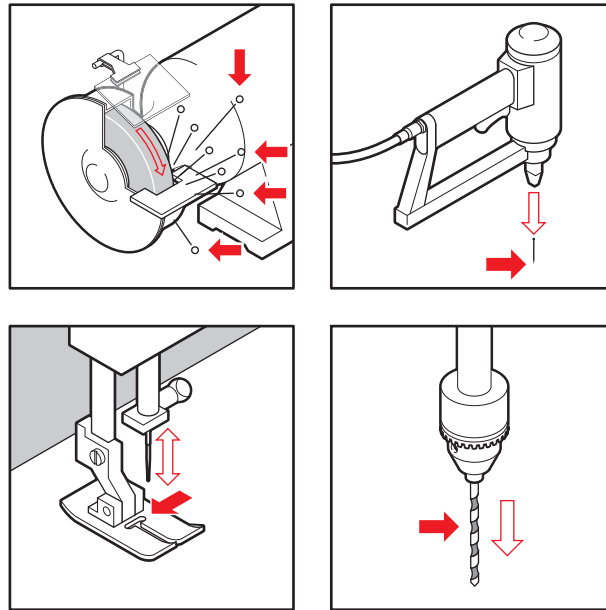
Stabbing and puncture by flying objects or moving parts of machinery.
